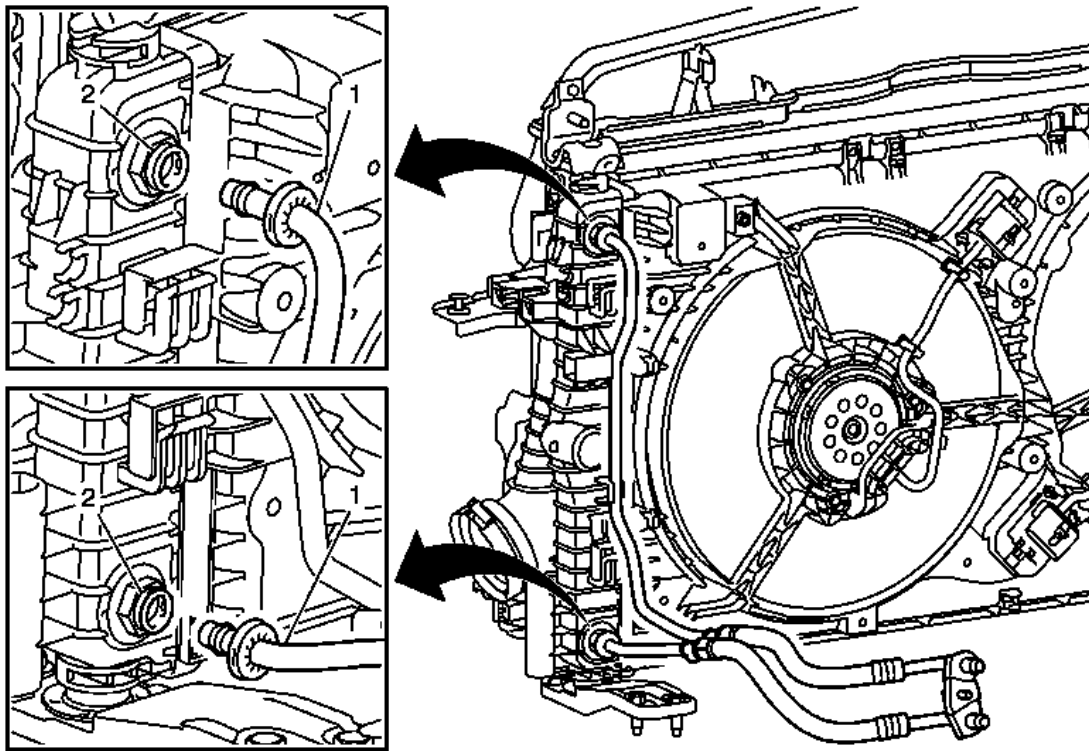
Transmission Fluid Cooler Hose/Pipe Quick-Connect Fittings (MDK)
